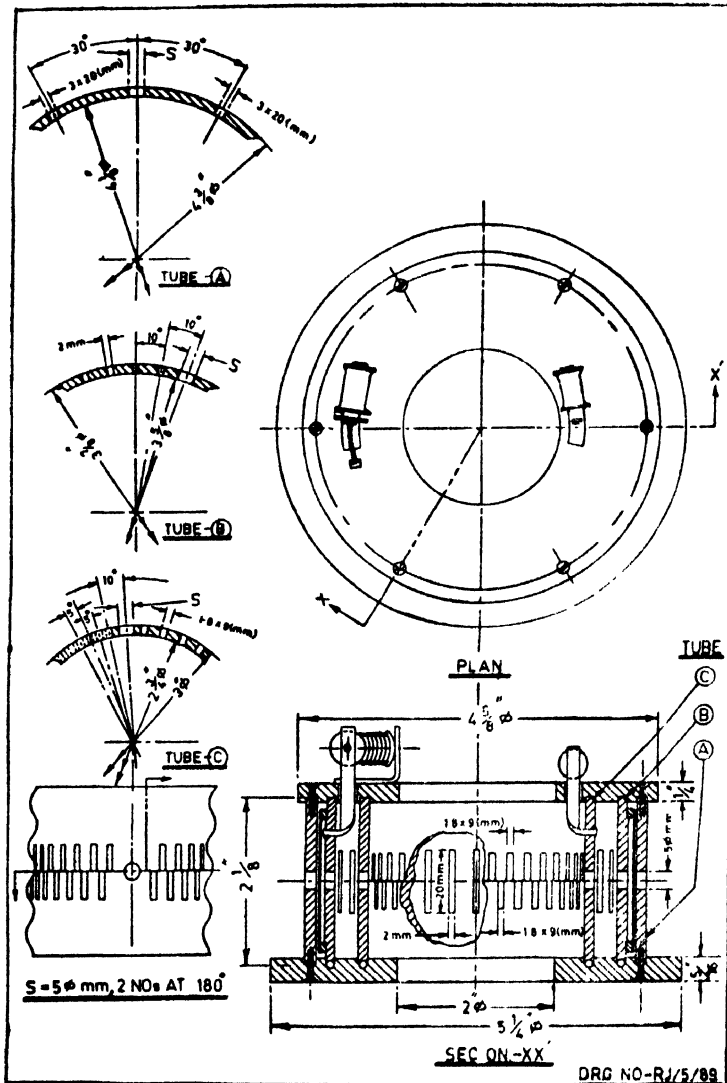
Schematic drawing of small scattering chamber attachment for conducting experiments with SSNTDs. Inner two cylinders marked B and C are mounted on ball bearings and can be moved by remote control. Detector foils are mounted on a ring between cylinders A and B and this is station any. Positions of the slots on cylinders B and C and their movements are depicted in subsidiary sketches.
